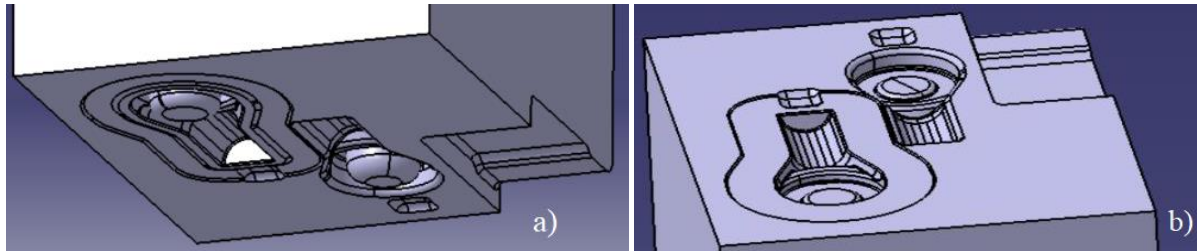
Tool engravings for preliminary and final connecting rod forging operations, a) upper die
